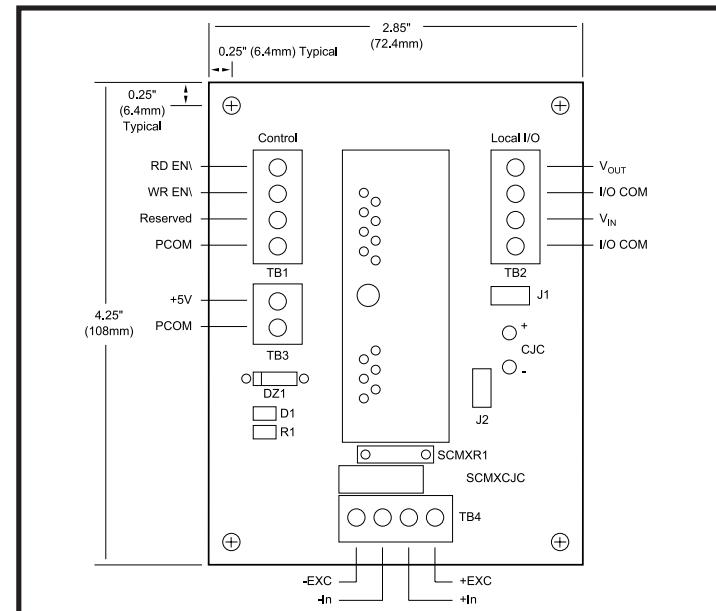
SCMXEV Evaluation Board Dimensions and Pin Layout
